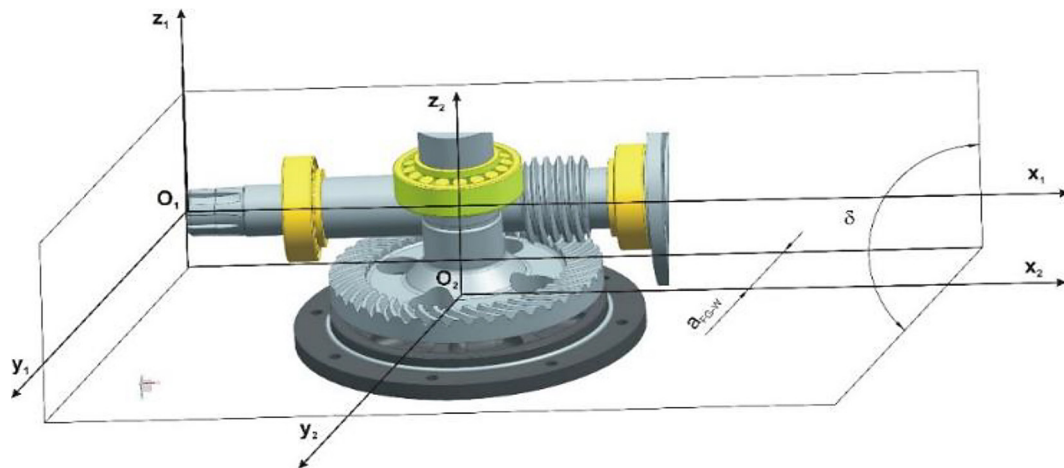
Mutual location of the worm axis and the disc wheel – a model obtained using CAD software
